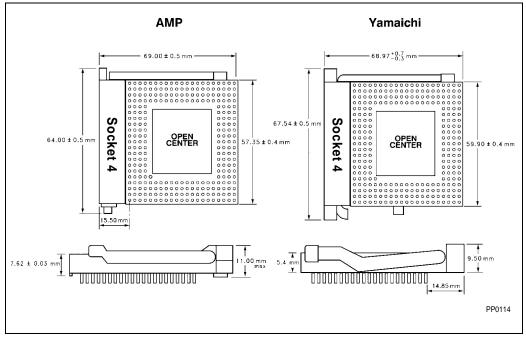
Socket 4 Footprint Dimensions (See socket manufacturer for the most current information.)
